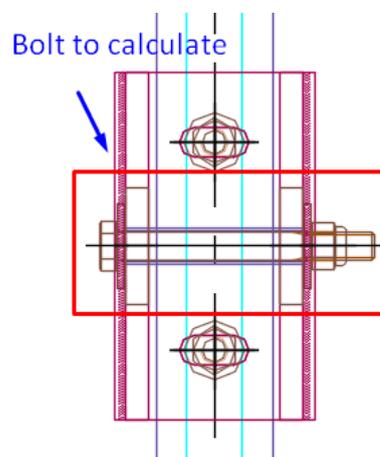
Bolt to calculate for bracket KR-3
